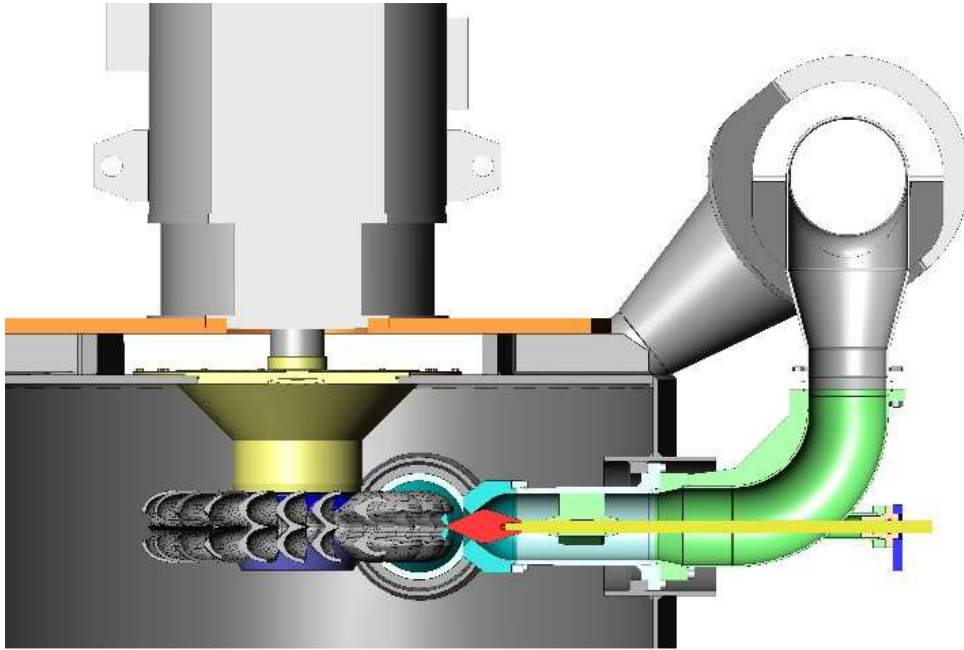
Cross section from the 3D tool that systemizes the generation of manufacturing drawings for Pelton turbines (© CRSM)
